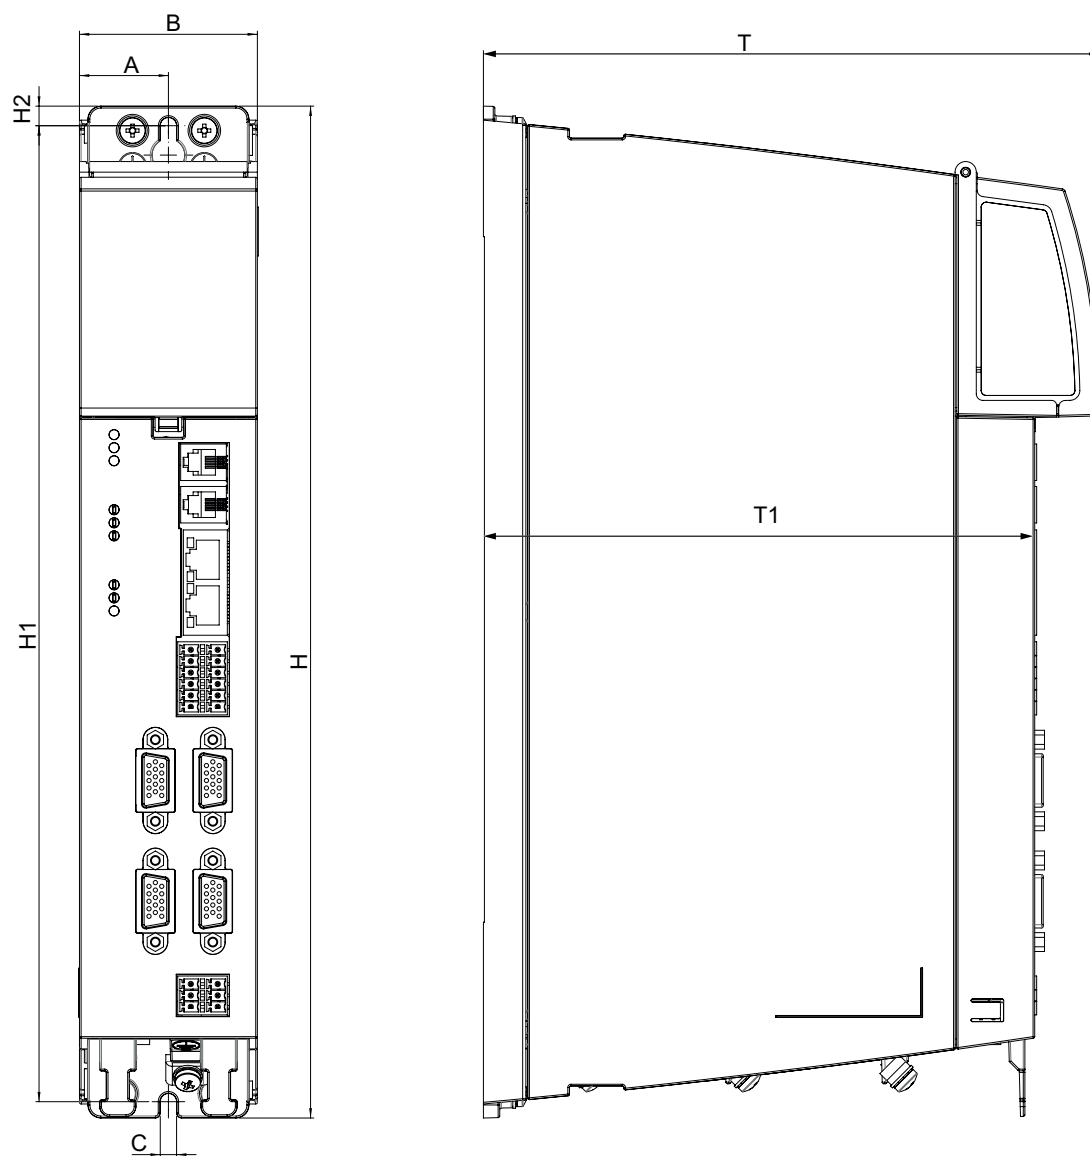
Dimensional drawing JM-3000 servo amplifier BG1 Coldplate (dimensions see Table 2.2)
